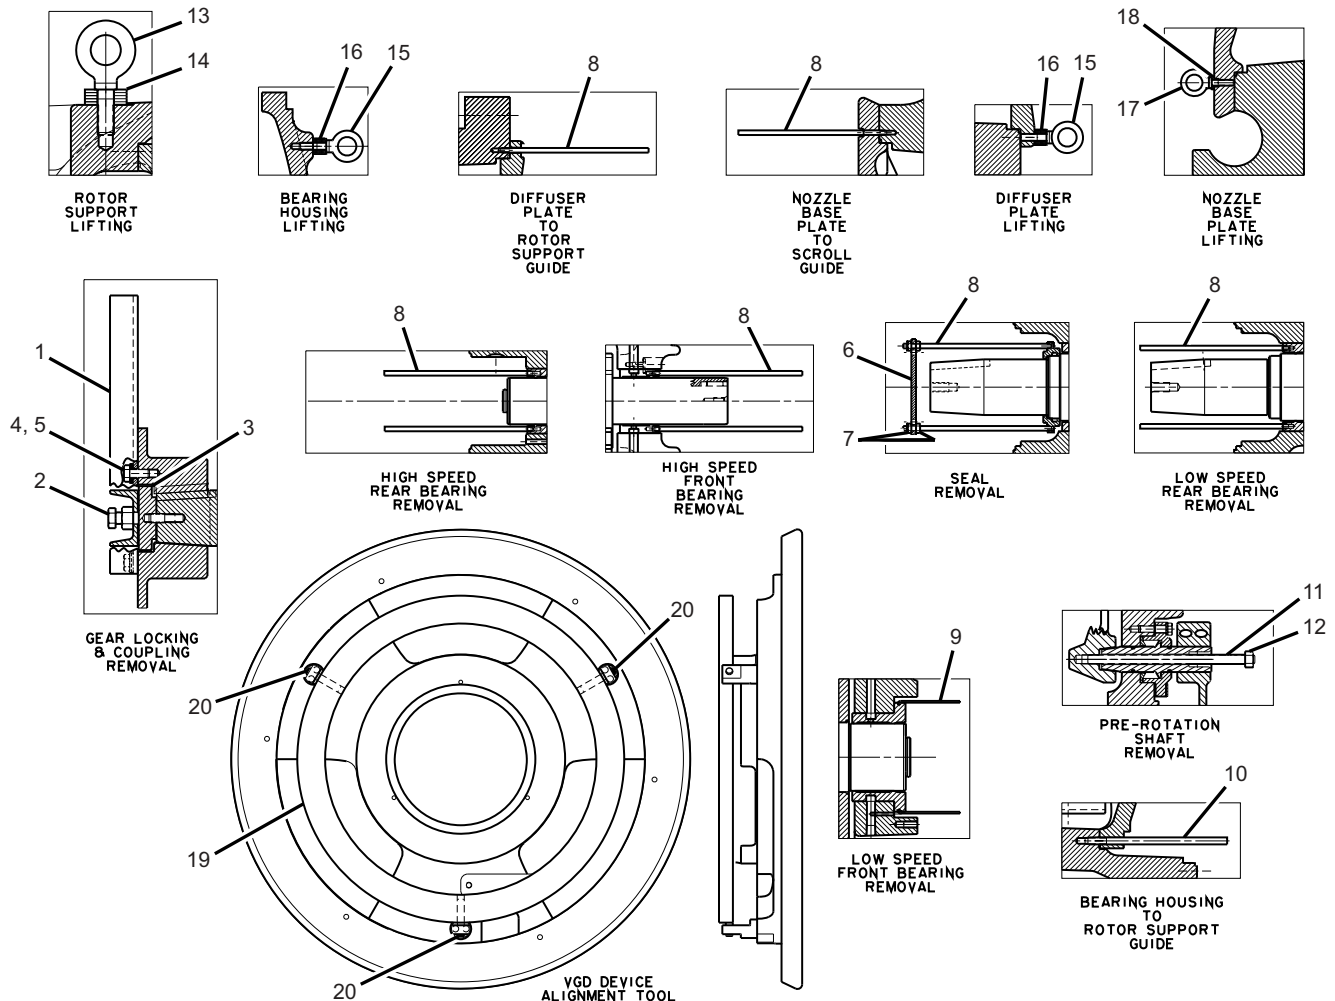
Use of Compressor Tools (-81, -90, -104)
